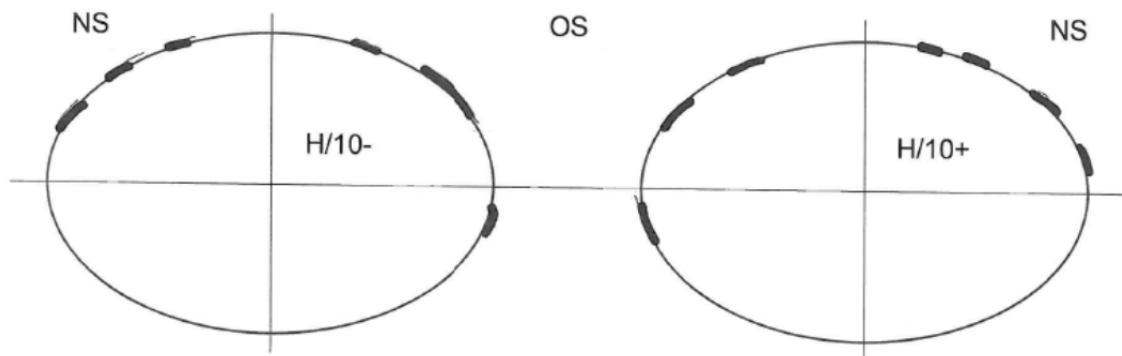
Fillet weld map diagram for band F/10.
